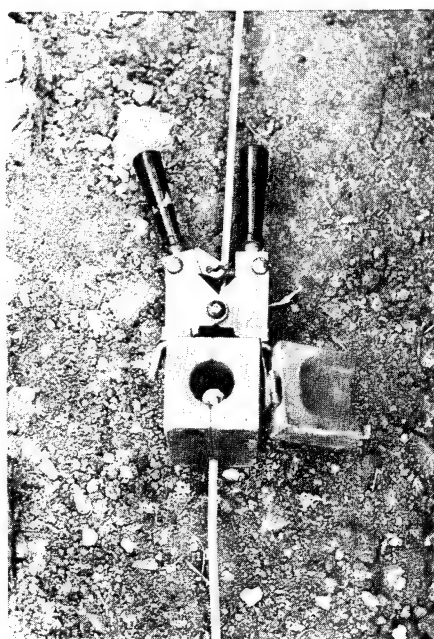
arranging the two ends of the steel rod in the crucible for thermit welding
